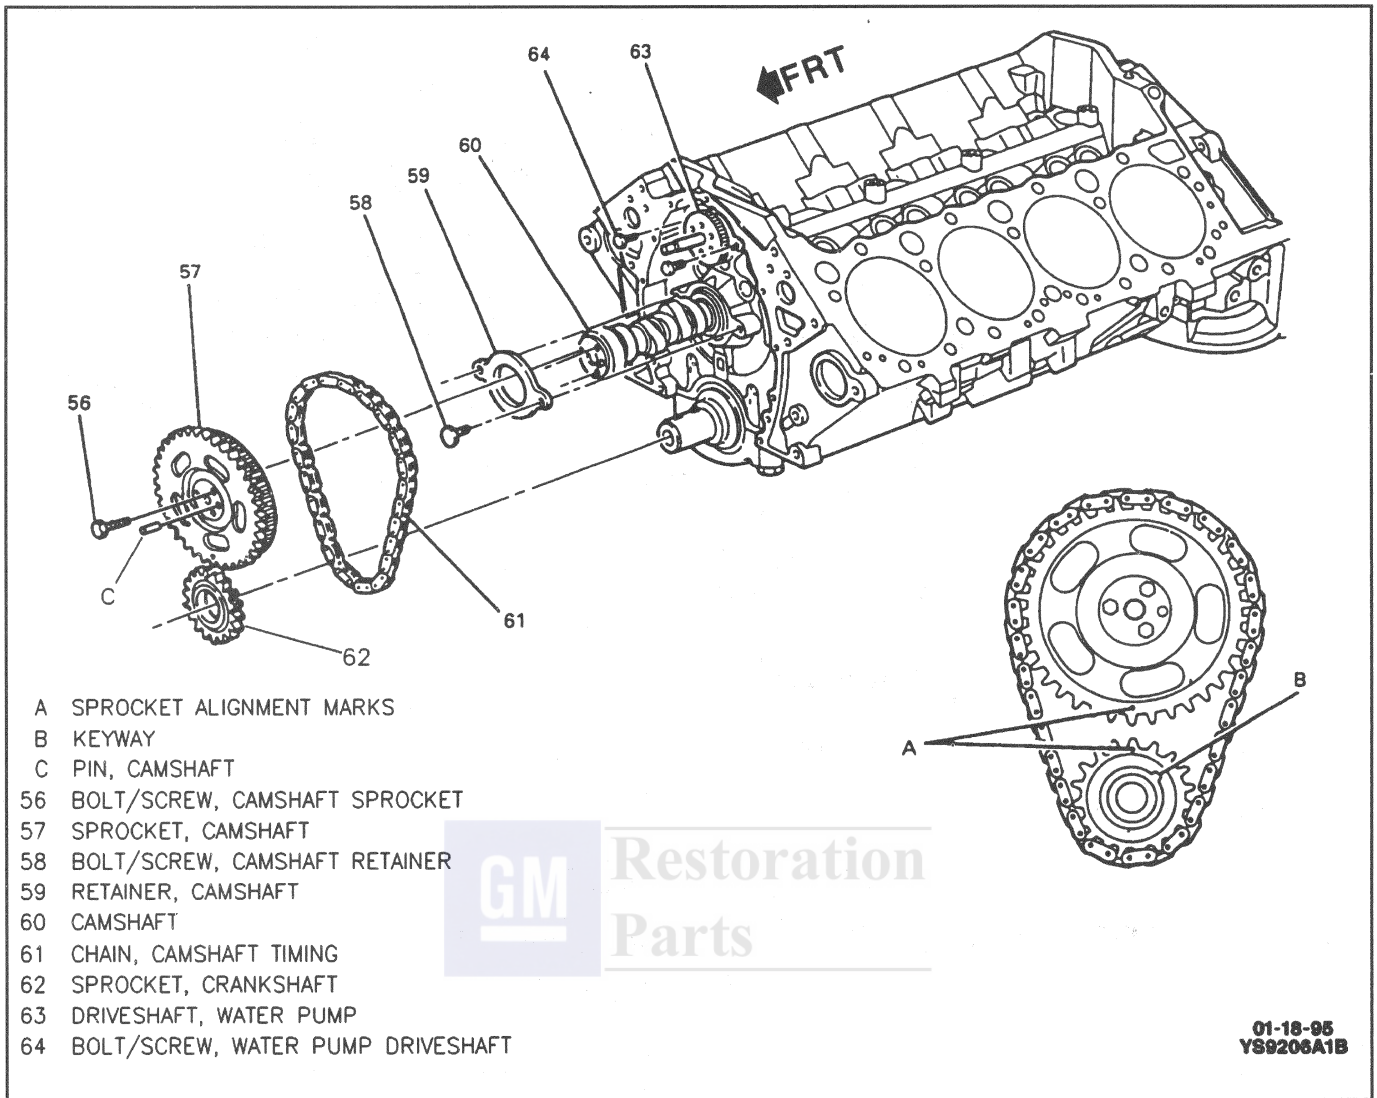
Camshaft Timing Chain, Sprockets, and Water Pump Driveshaft Assembly
